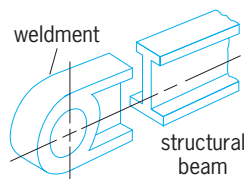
Weldment is a preformed component designed to be welded to other structural or machine components.
